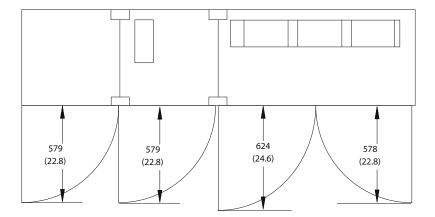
Front, Side, and Door Clearance Dimensions for F4
